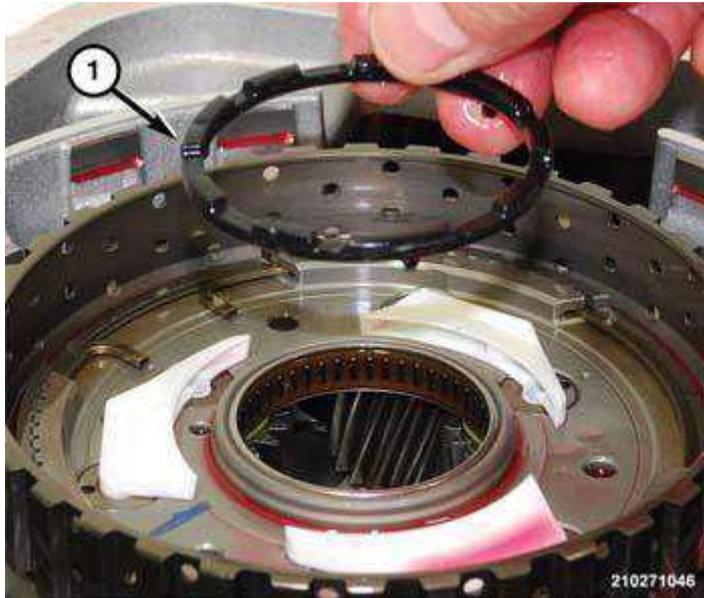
Thrust Washer & Planetary Gear Assembly Hub
